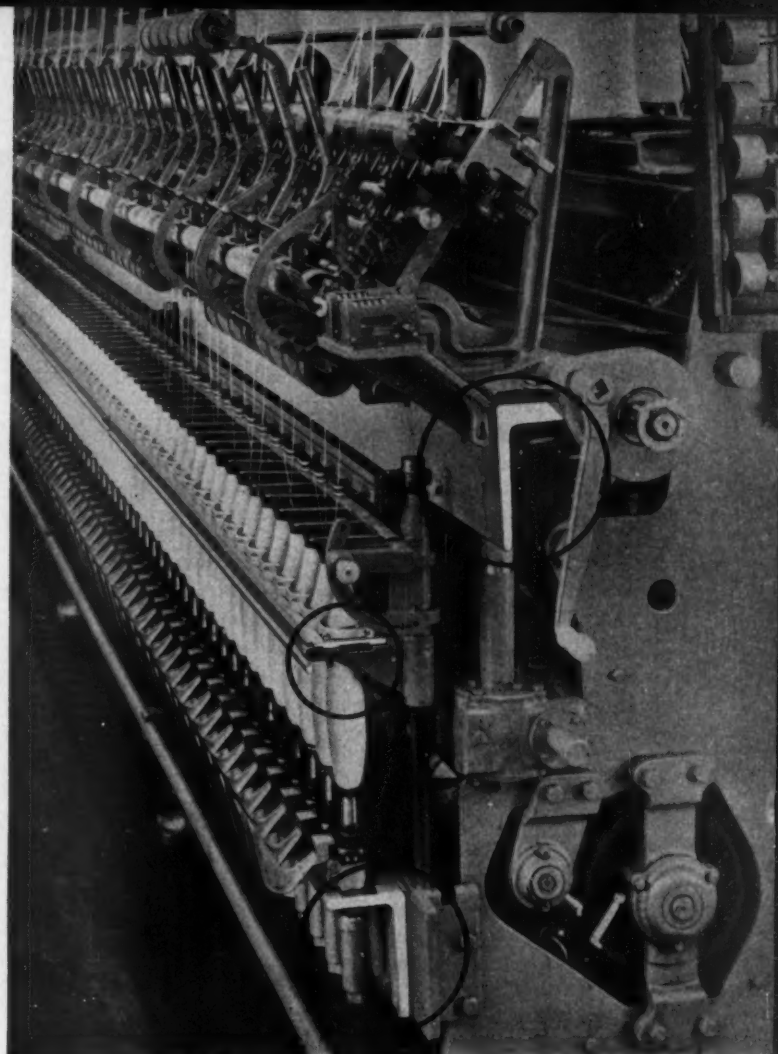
Textile machine, built by McGlynn Hays, employs extruded aluminum members. Extruded parts are shown in circles at end of frame
